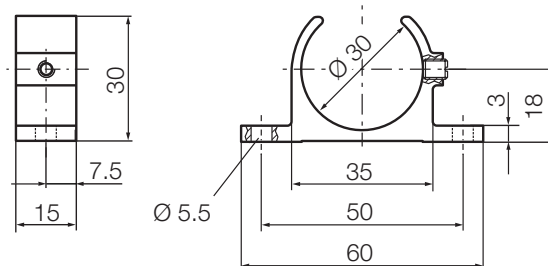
Mounting bracket BTL6-A-MF01-A-50
